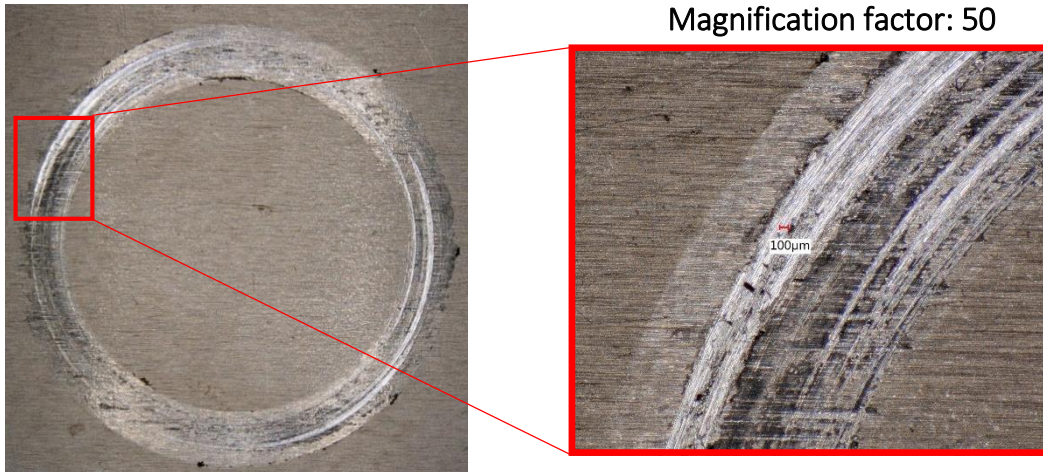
Visual inspection of the AA70XX T76 sheet specimen after testing at 170°C using PTFE Spray
